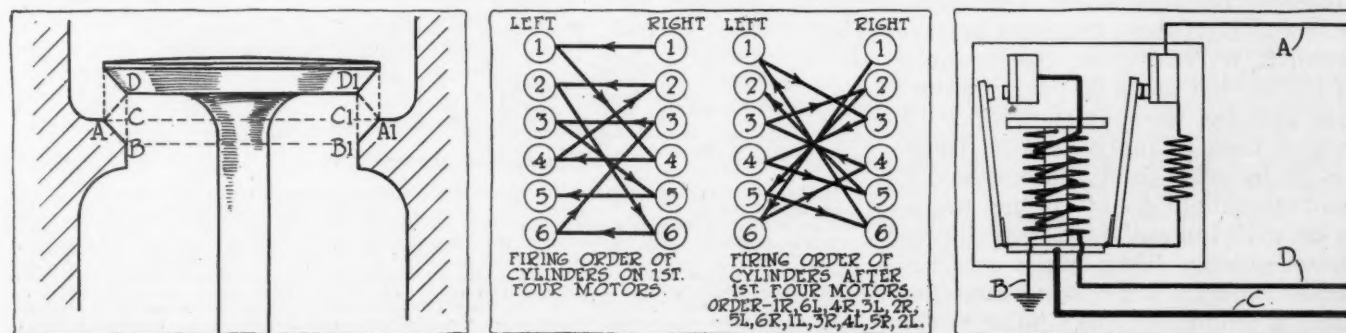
Left—Diagram referring to method of calculating clear opening of a valve; center, firing order of Pathfinder twelve motors; right, control system used with 1916 Heinze generator
